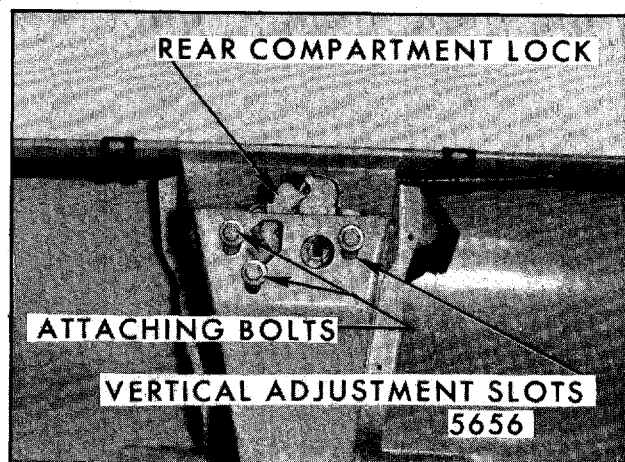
Rear Compartment Lock - "H-11, 77" Styles
